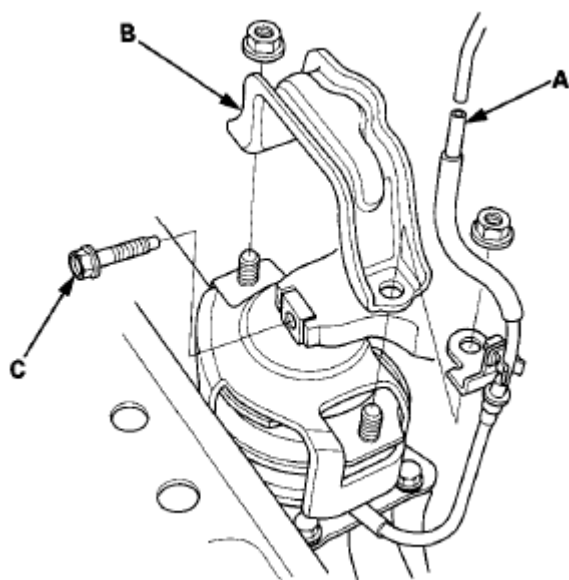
Removing Front Engine Mounting Mount Stop And Front Engine Mount Bolt
